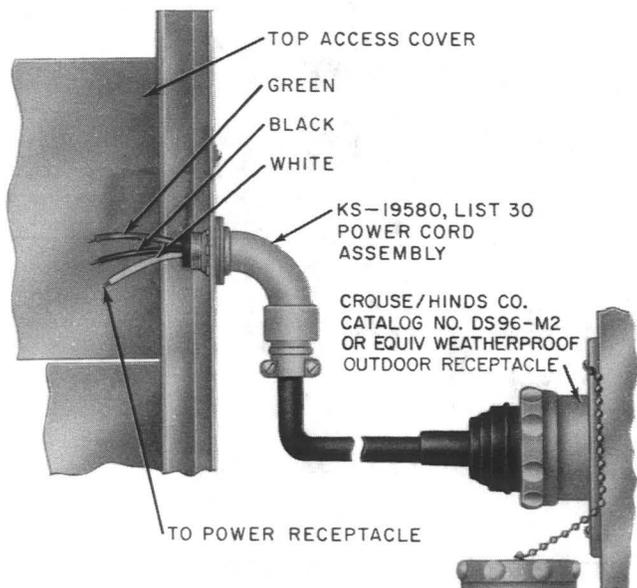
KS-19580, List 30 Power Cord Assembly Overhead Entrance
